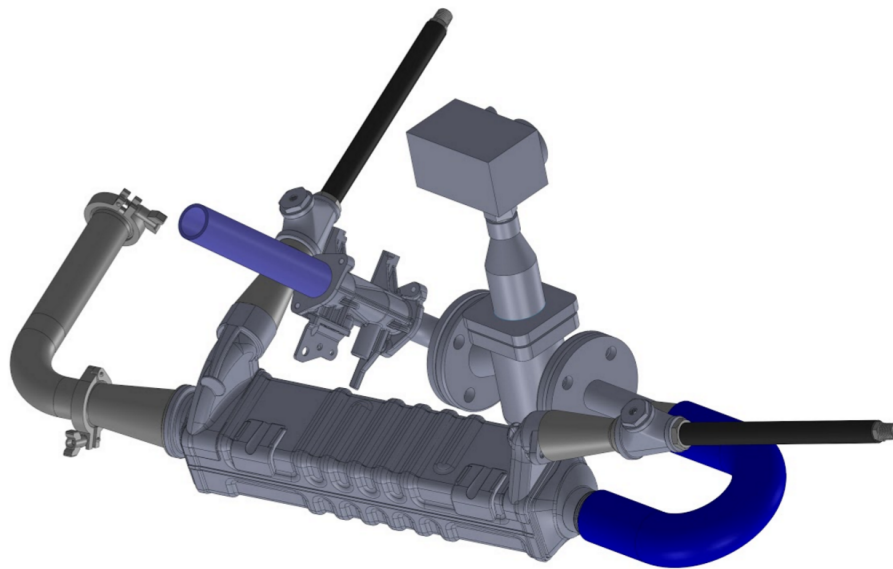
SolidWorks model of the entire EGR system. The exhaust enters from the exhaust plenum at the top left right before a 90° turn leads the gas through the cooler. Attached to the cooler are the coolant lines witch supplies the coolant from an external chiller. After the cooler the gas travels through a 180° silicone hose and the control valve before making another 90° turn that takes the gas through venturi and over the cooler. The outlet of the EGR is the blue hose after the venturi.
